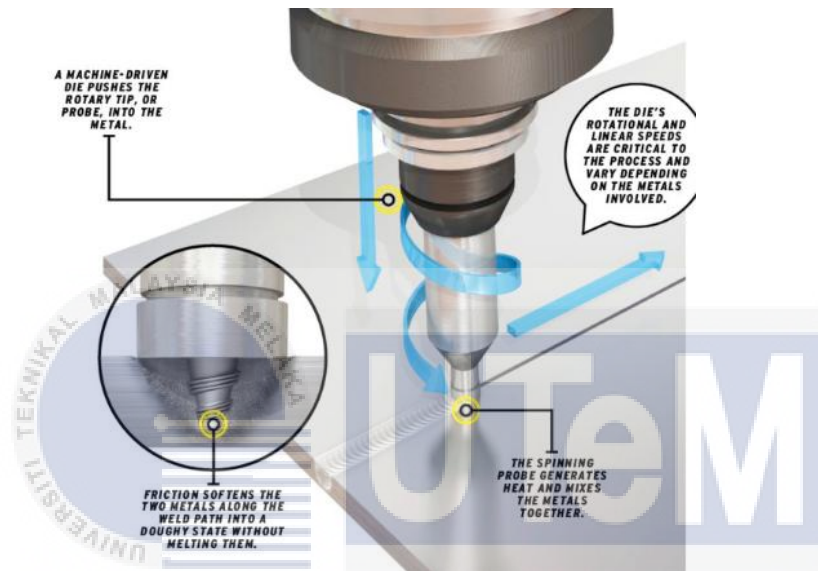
Friction stir welding (FSW) joining material process
